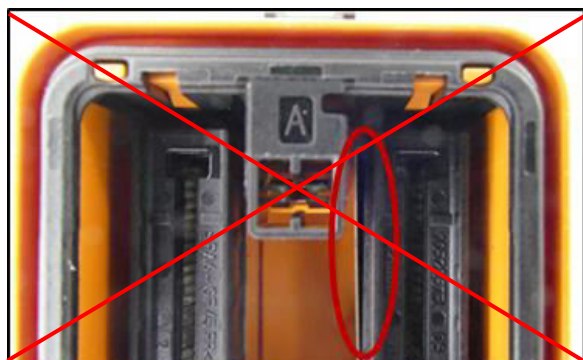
Error pattern exemplary, caused by cracked welded joint
